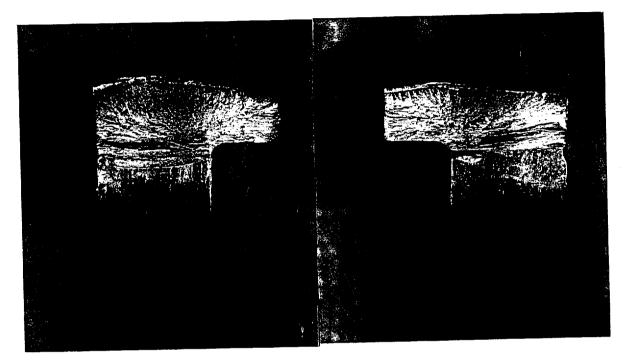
Macro Photographs Showing the Fracture Surfaces from Failed Pawl
